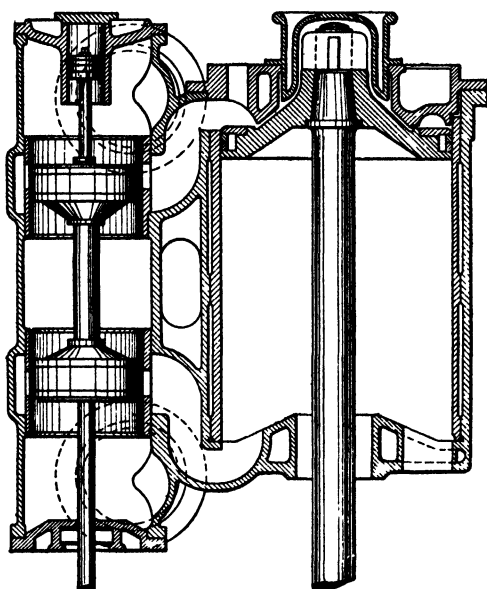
Sectional View of Marine Engine Cylinder, Piston and Steam Ports
